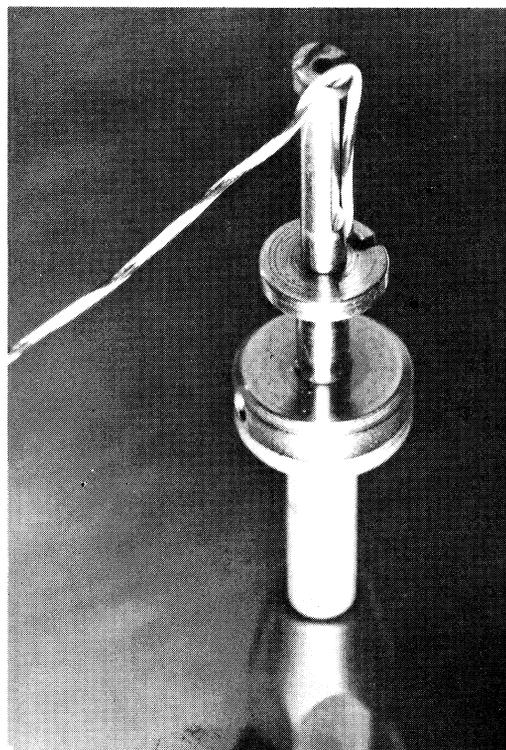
A Cut-Strip and Wrap tool tip used to produce wrapped joints from insulated wire.
